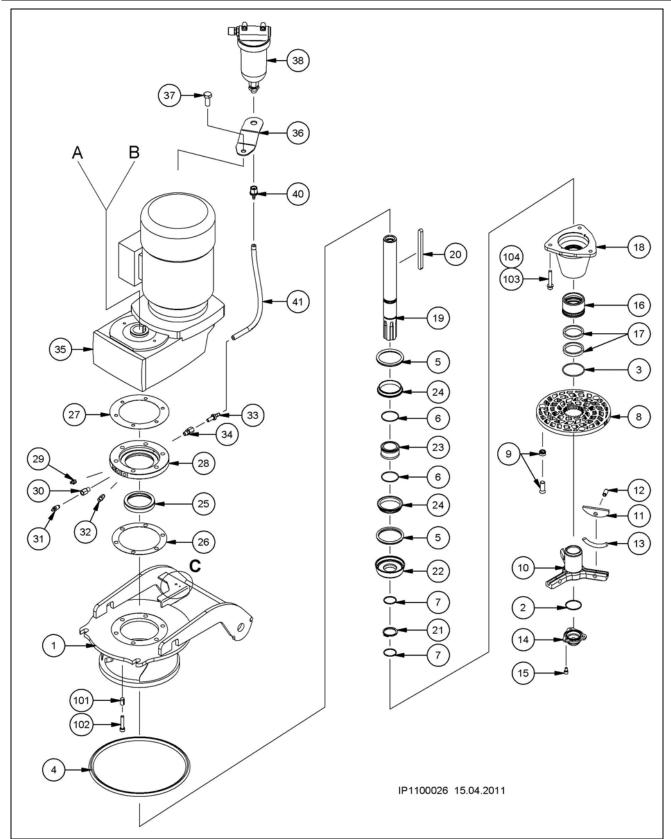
Sealing package replacement (extract with pos. no. from the current spare parts list RCX-20G)
